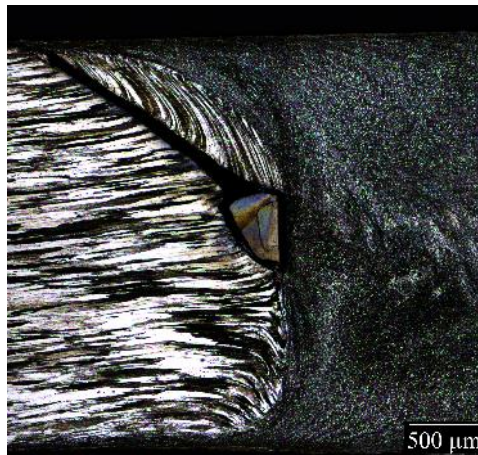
Metallographic inspection showing the exact final position of thermocouple placed in measurement point 4 after welding of an AA2196 SRBT-FSW LEW sample.
